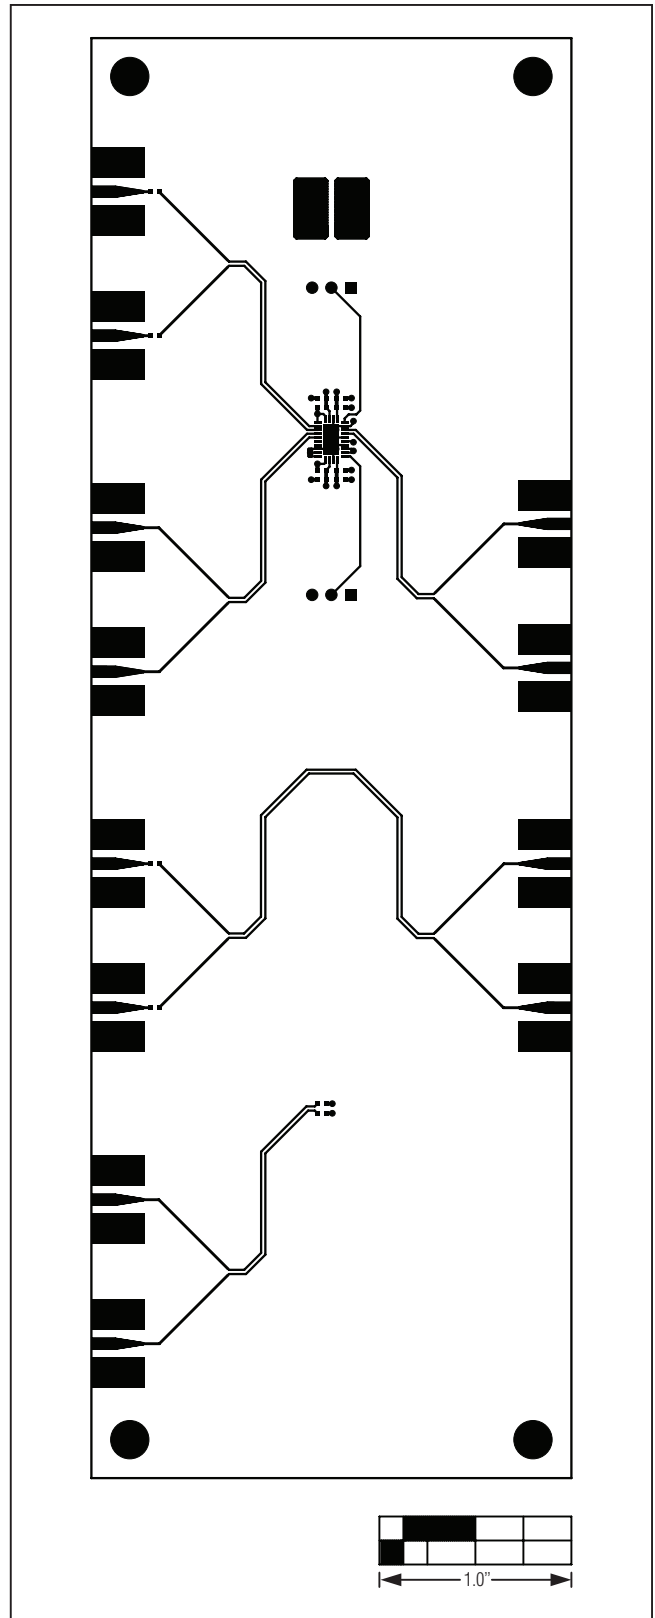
MAX4888B EV Kit PCB Layout—Component Side
